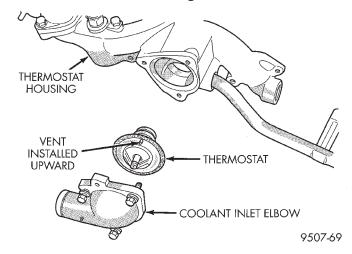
Thermostat, Housing and Inlet Elbow—2.5L Engine
